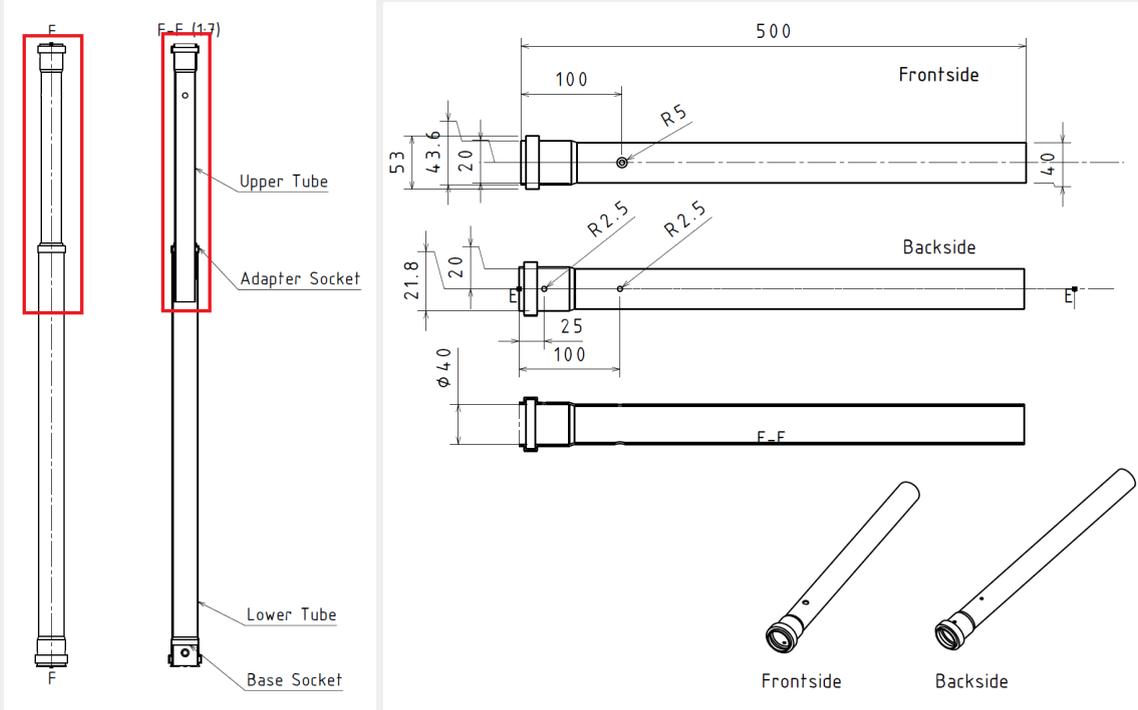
Dimensions of the 3 holes to be drilled in the upper tube
